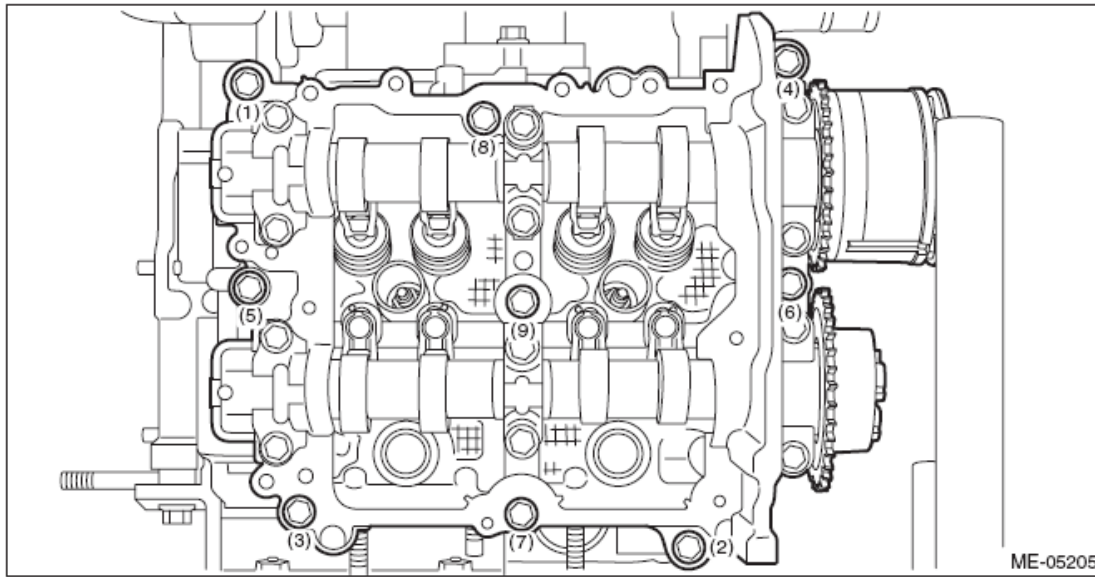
Identifying Cam Carrier Bolts Loosening Sequence
